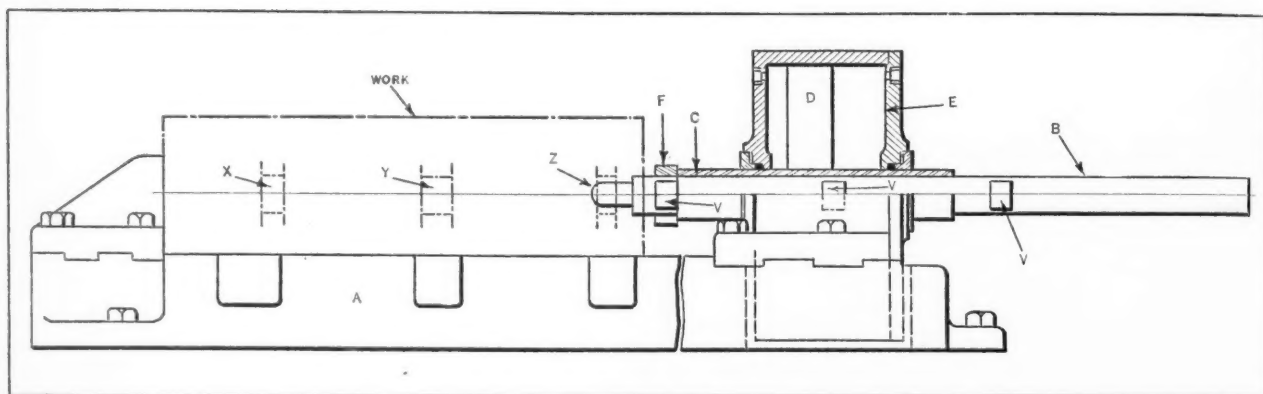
Fixture Employed in Assembling Three Bushings in a Straight Line in Automobile Crankcases
